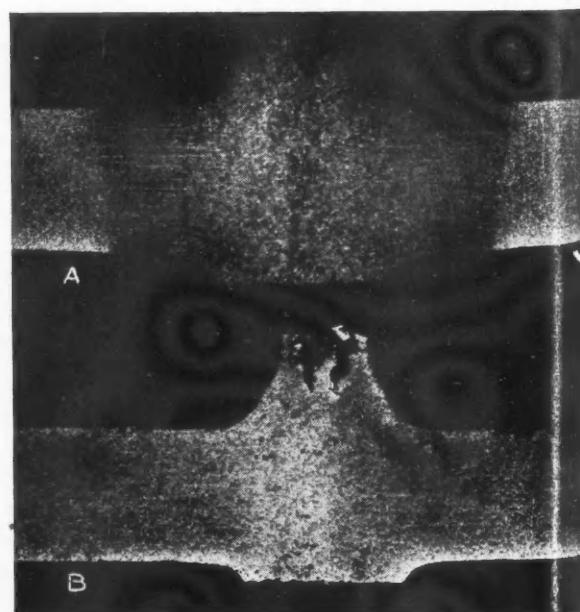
A—Macrophoto of flash weld section before heat treatment. B—Macrophoto of flash weld section after heat treatment.
